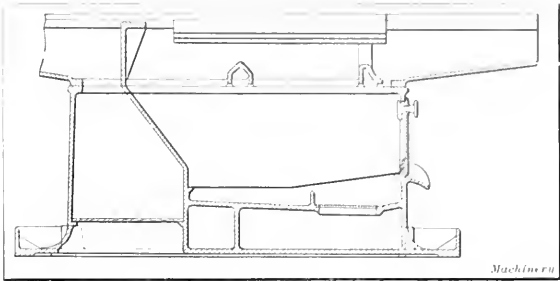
Hollow Base of Turret Lathe used for receiving Chips and Lubricant—Tool Cupboard at Left
